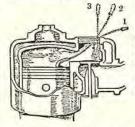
Scraping tools of special design are necessary for scraping the inside of combustion chamber and the head of a piston when the cylinder head is not detachable and where the pistons are not removed. The work can be done through the valve cap or plug holes.²
